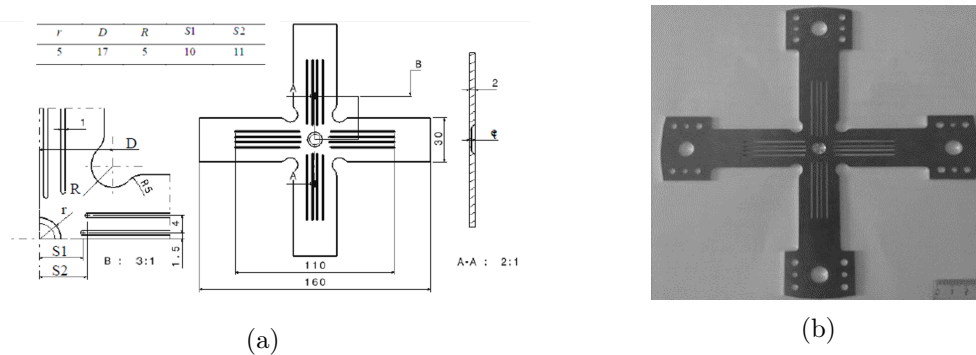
(a) Sketch of the optimised cruciform specimen (dimension in mm) and (b) specimen machined explored in [Liu *et al.* 2015].
